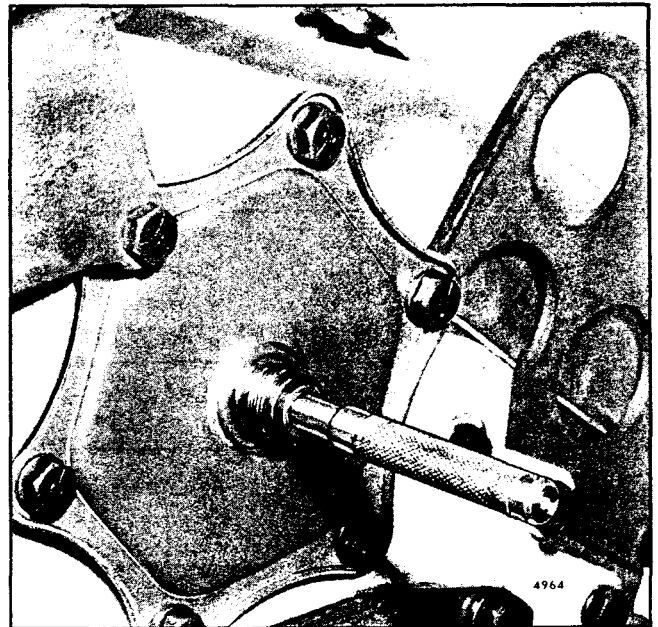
Checking Tachometer Drive Shaft Alignment
